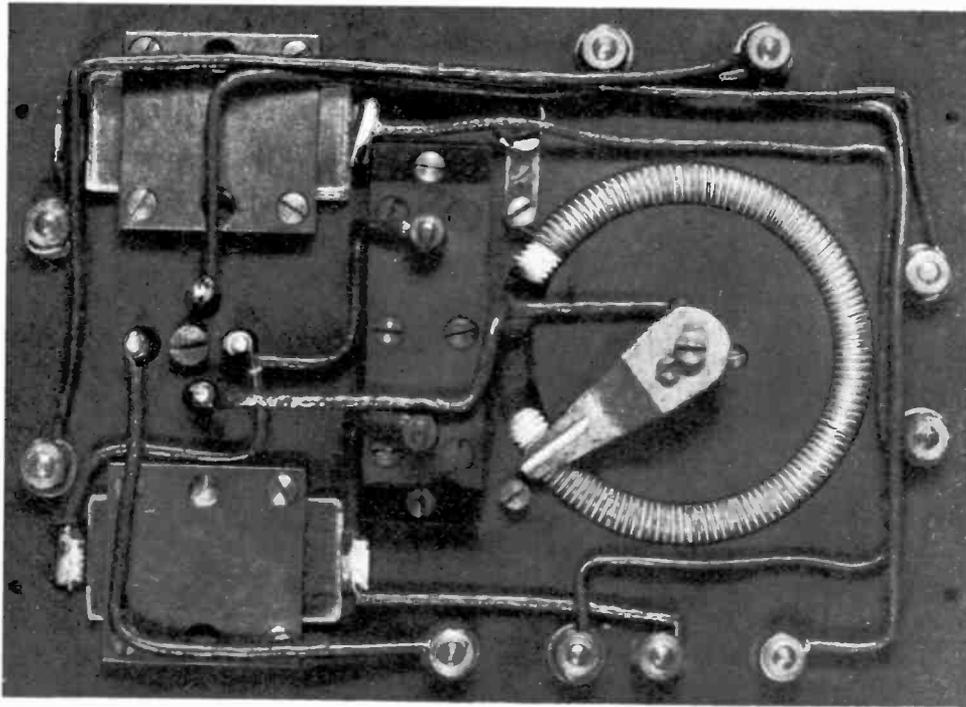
Other types of component parts are made use of here. It is a simple matter to adapt the lay-out to suit the parts available.
